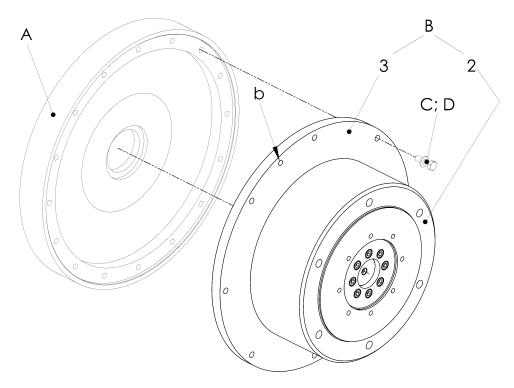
Mounting the pre-mounted coupling to the flywheel
